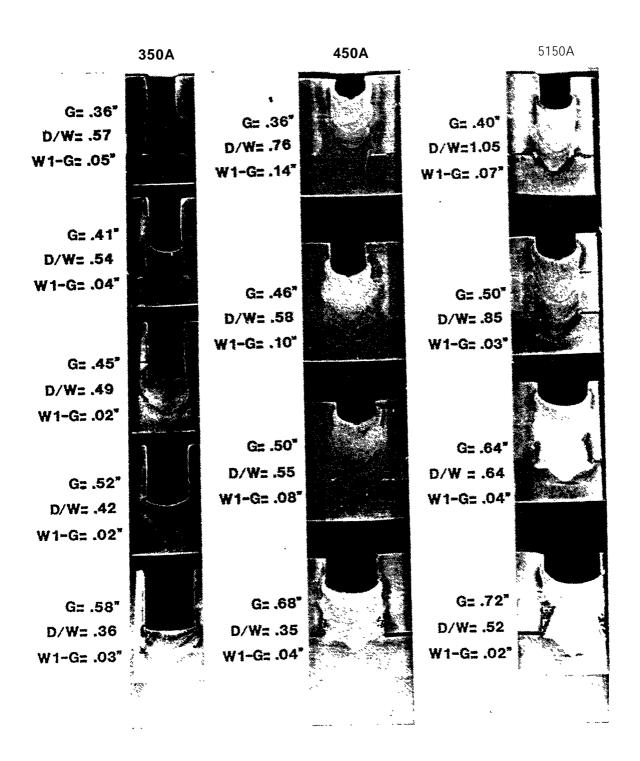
Cross Sections of 2x1/16" Solid Electrode Welds
